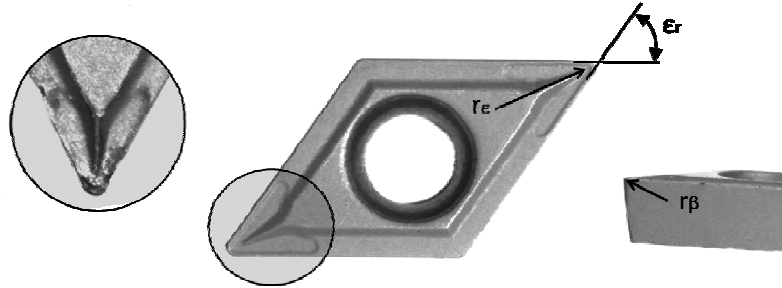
Geometrical measurement tasks on a rhombical cutting tool insert requiring data acquisition with different sensor principles: Macro shape with corner angel ϵ_r and nose radius r_e (center); Micro shape with cutting edge radius r_β (right); Wear (left)
